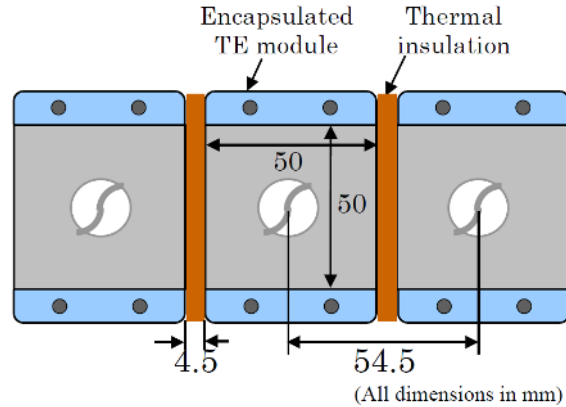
Horizontal cross section of the TE module section (only 3 tubes shown)
